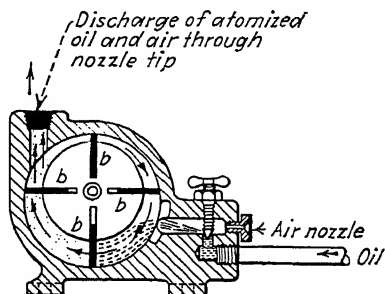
Rotary pump used for making combustible mixture of oil vapor and air.
